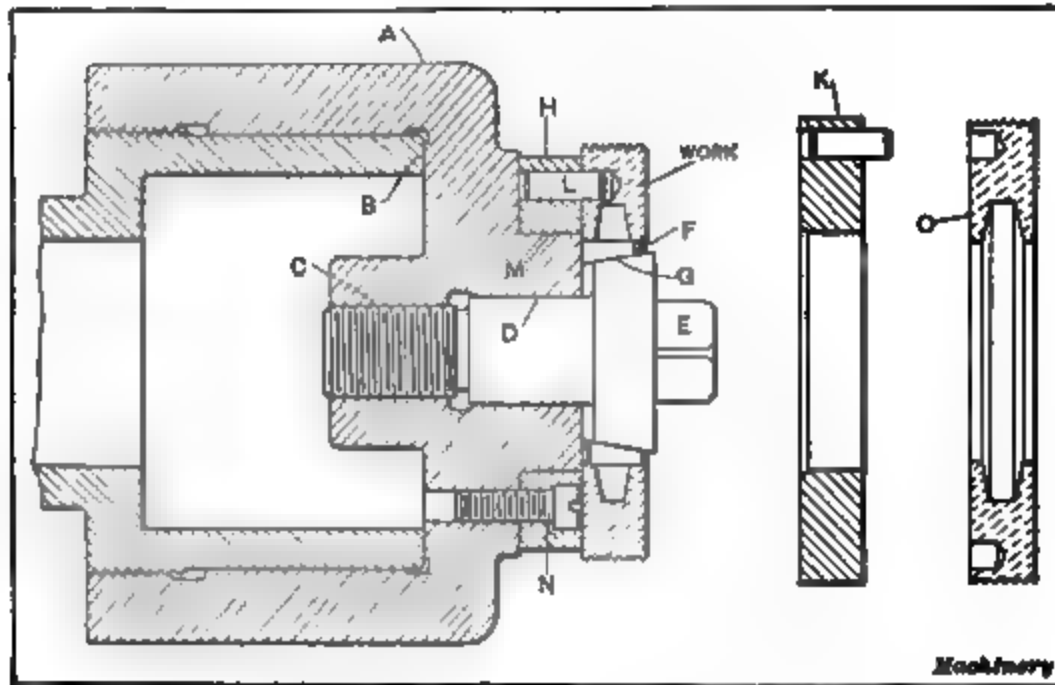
Arbor having Taper Plug which expands Split Bushing
